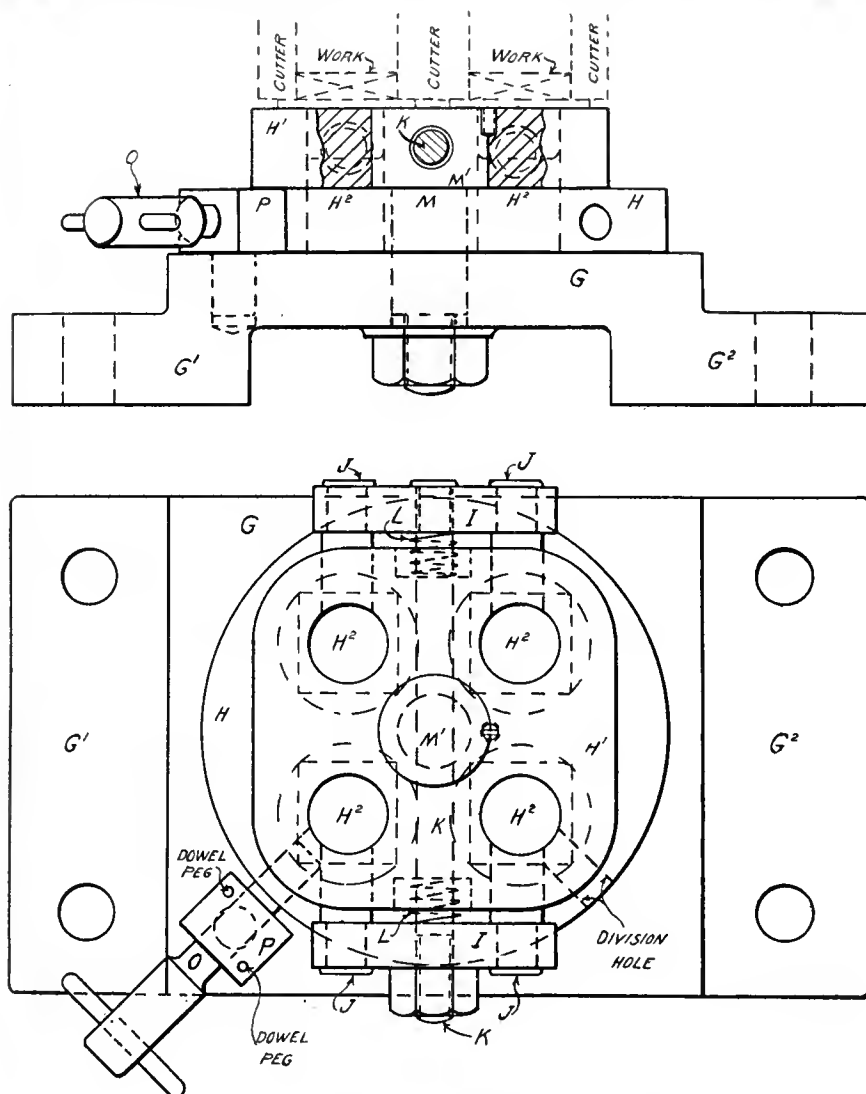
SPANNER FLATS MILLING FIXTURE.
